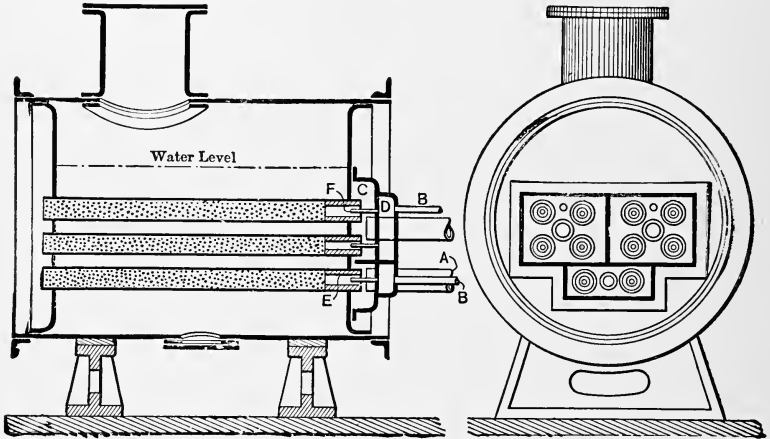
Experimental Boiler Involving the Principles of "Surface Combustion."
